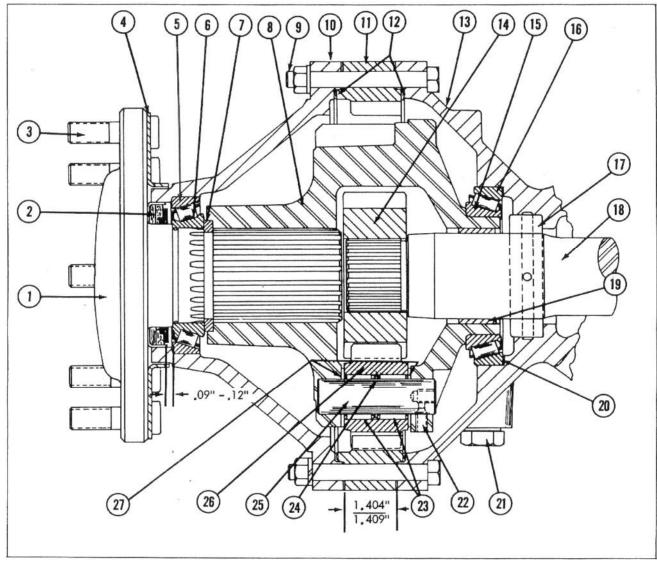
Axle Planetary Assembly - Wide Ring Gear
